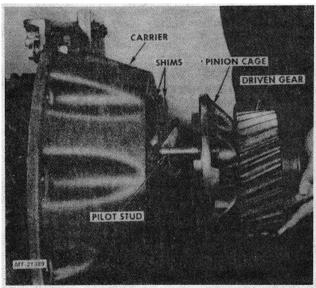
Removing Pinion and Cage Assembly (forward rear axle shown)
